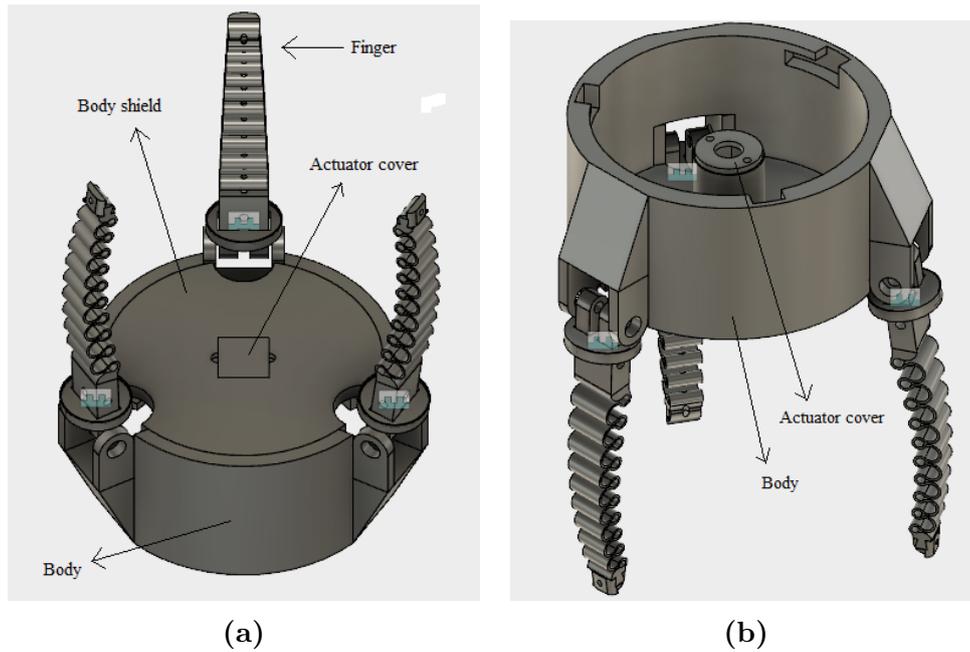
First assemble of the soft gripper: (a) Top view; (b) Bottom view.
